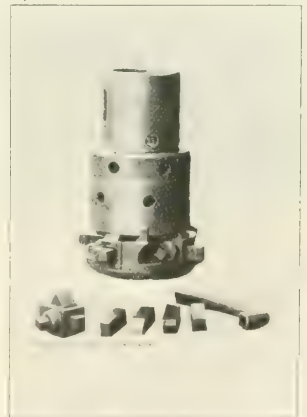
MICROMETER TOOL FOR BORING MACHINE.
